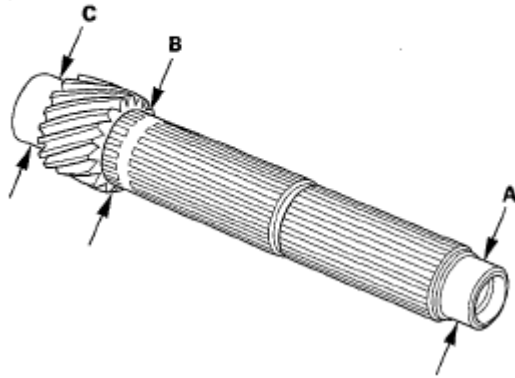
Identifying Gear And Bearing Contact Areas For Wear And Damage With Specifications
